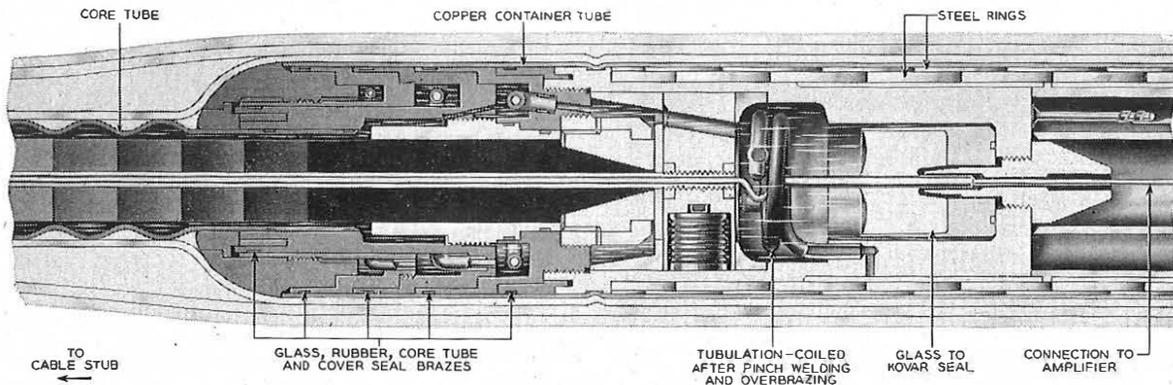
SECTIONAL VIEW OF SEAL ASSEMBLY AT EACH END OF REPEATER.
